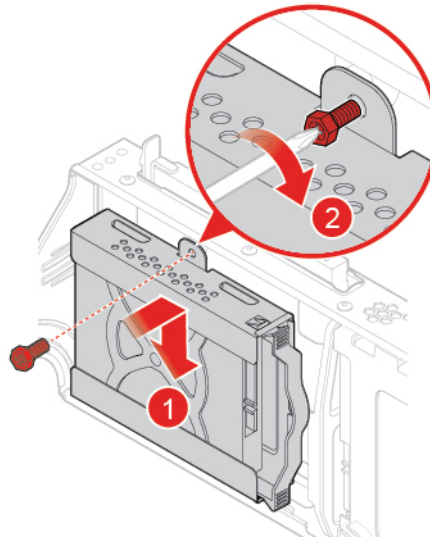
Installing the outer 2.5-inch secondary storage drive bracket
